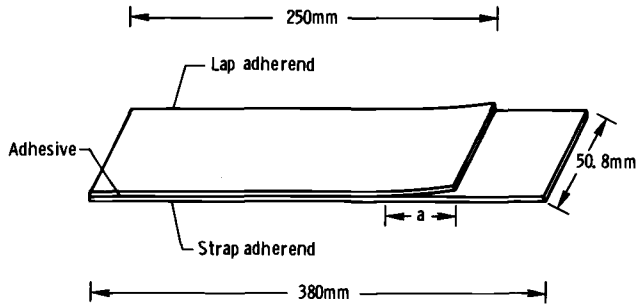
Cracked-lap-shear (CLS) specimen.
